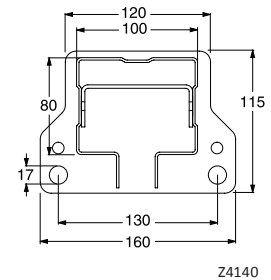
Stand feet of the support profiles (all dimensions in mm)
